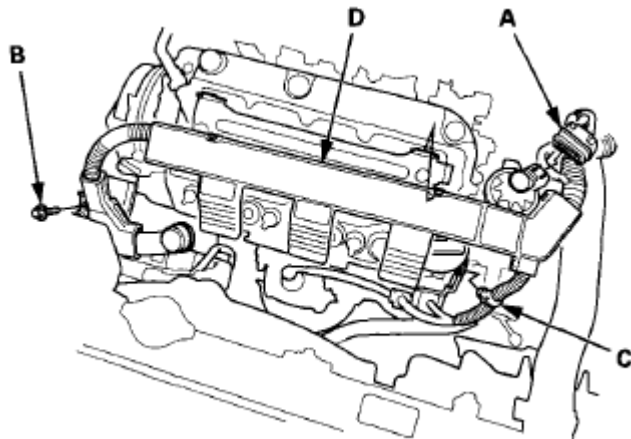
Identifying EGR Valve Connector, Mounting Bolt And Harness Clamp
